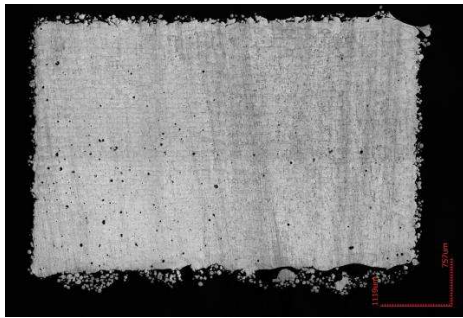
Example picture of specimen cross-section (Specimen no. 25)
